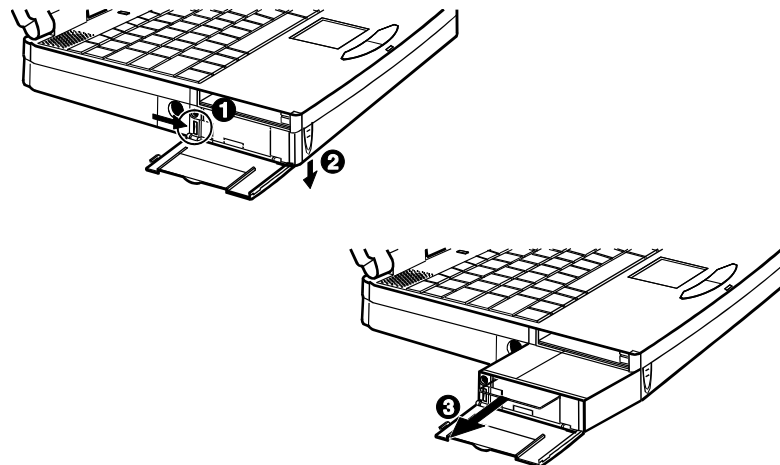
REMOVING THE HARD DISK DRIVE
